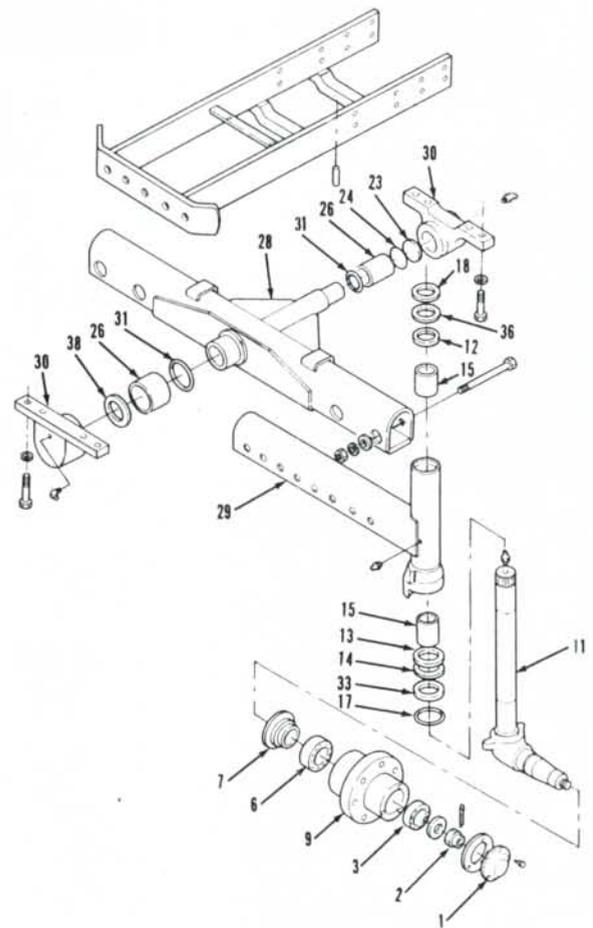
Exploded view of adjustable front axle used on Model 2110.
